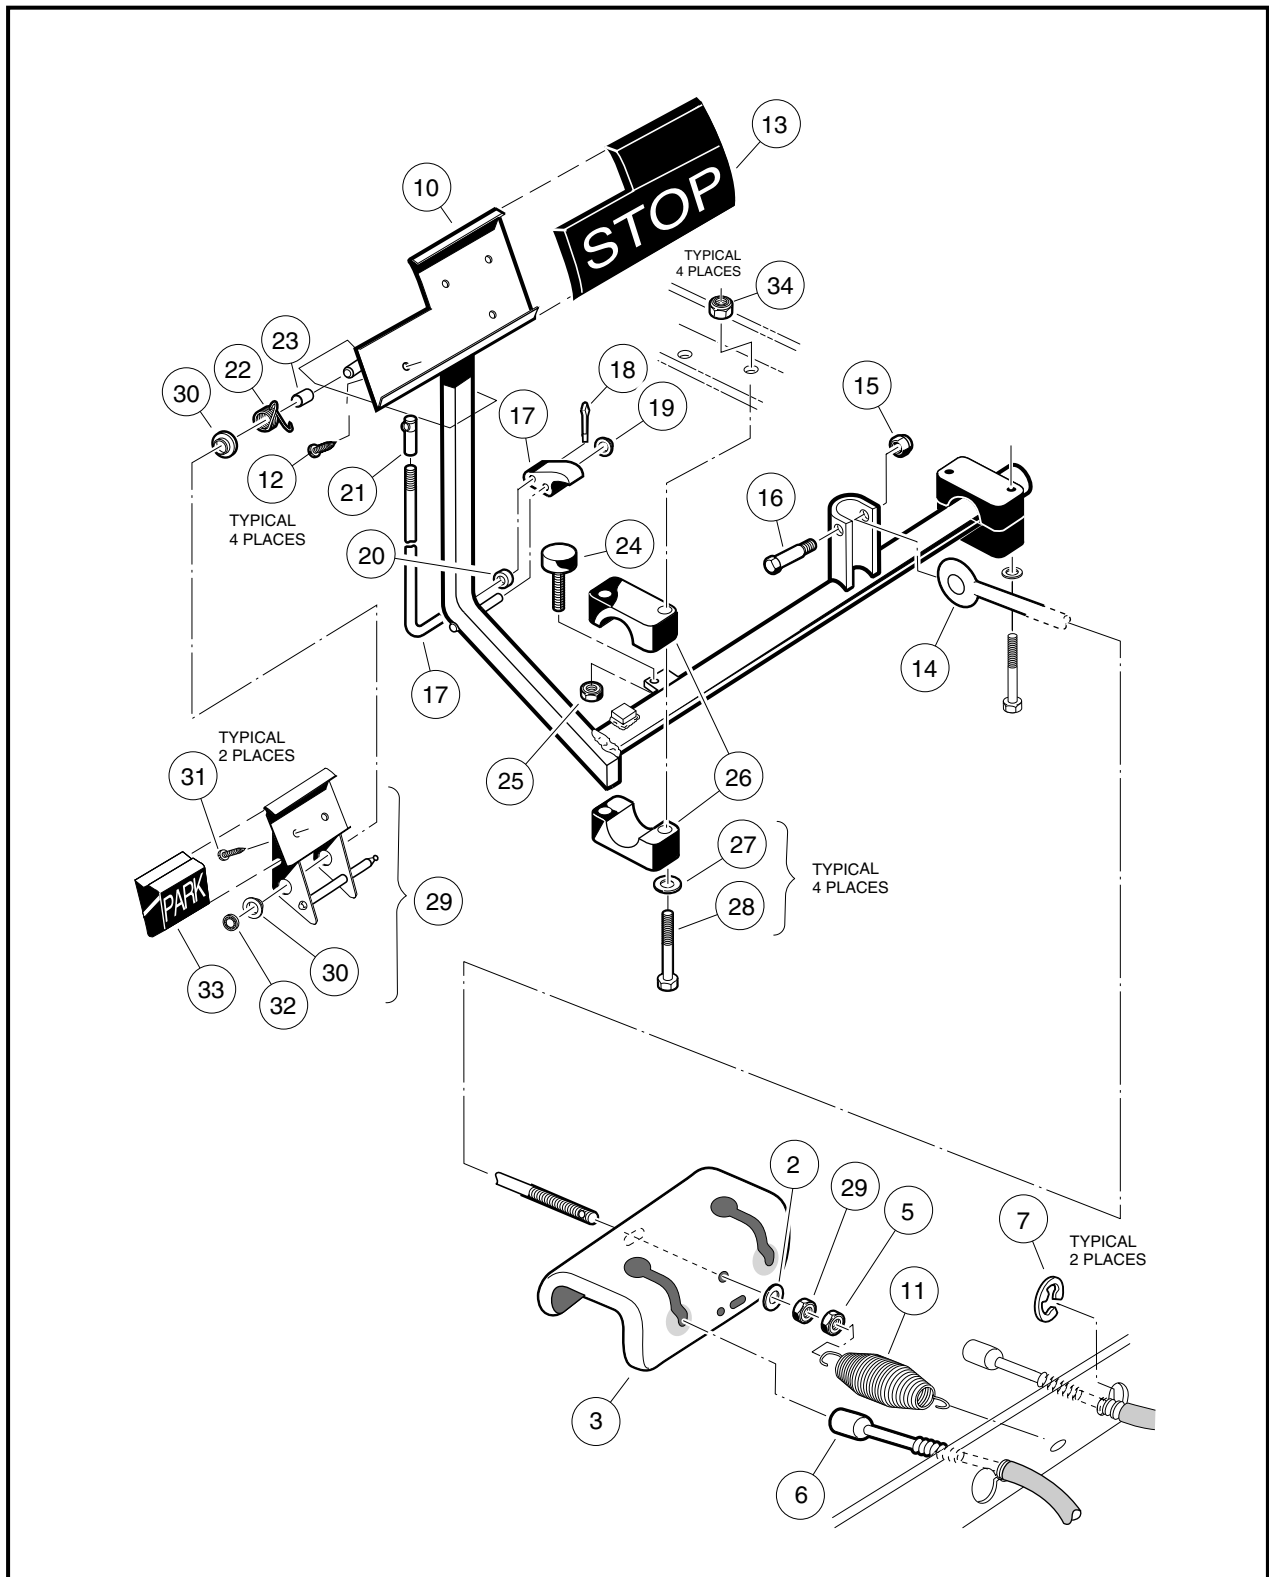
Brake and Park Brake Pedal Assembly and Mounting – Two-Wheel Brake Vehicles
